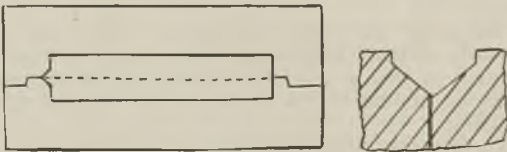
TYPE OF MOULD USED AT THE NATIONAL PHYSICAL LABORATORY.
